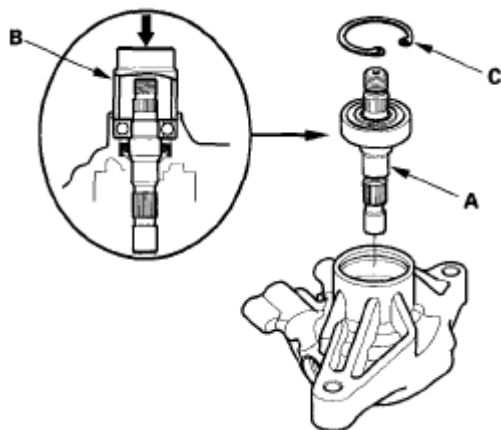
Identifying Pump Driveshaft Position In Pump Housing
